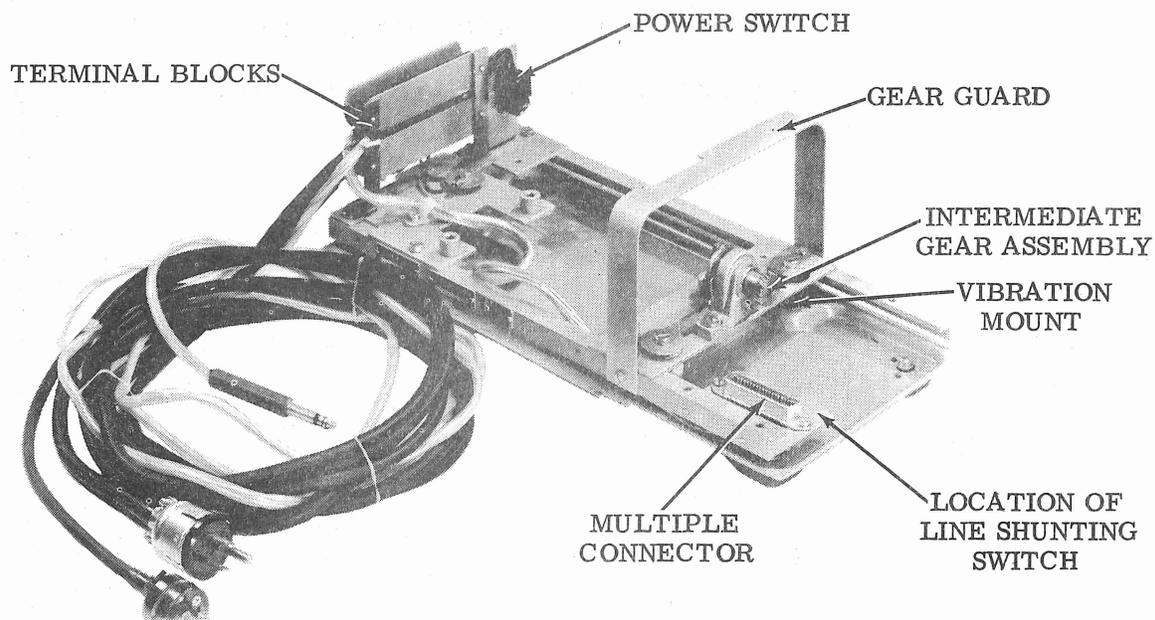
Single Contact, Single Mounting Transmitter Distributor Base
